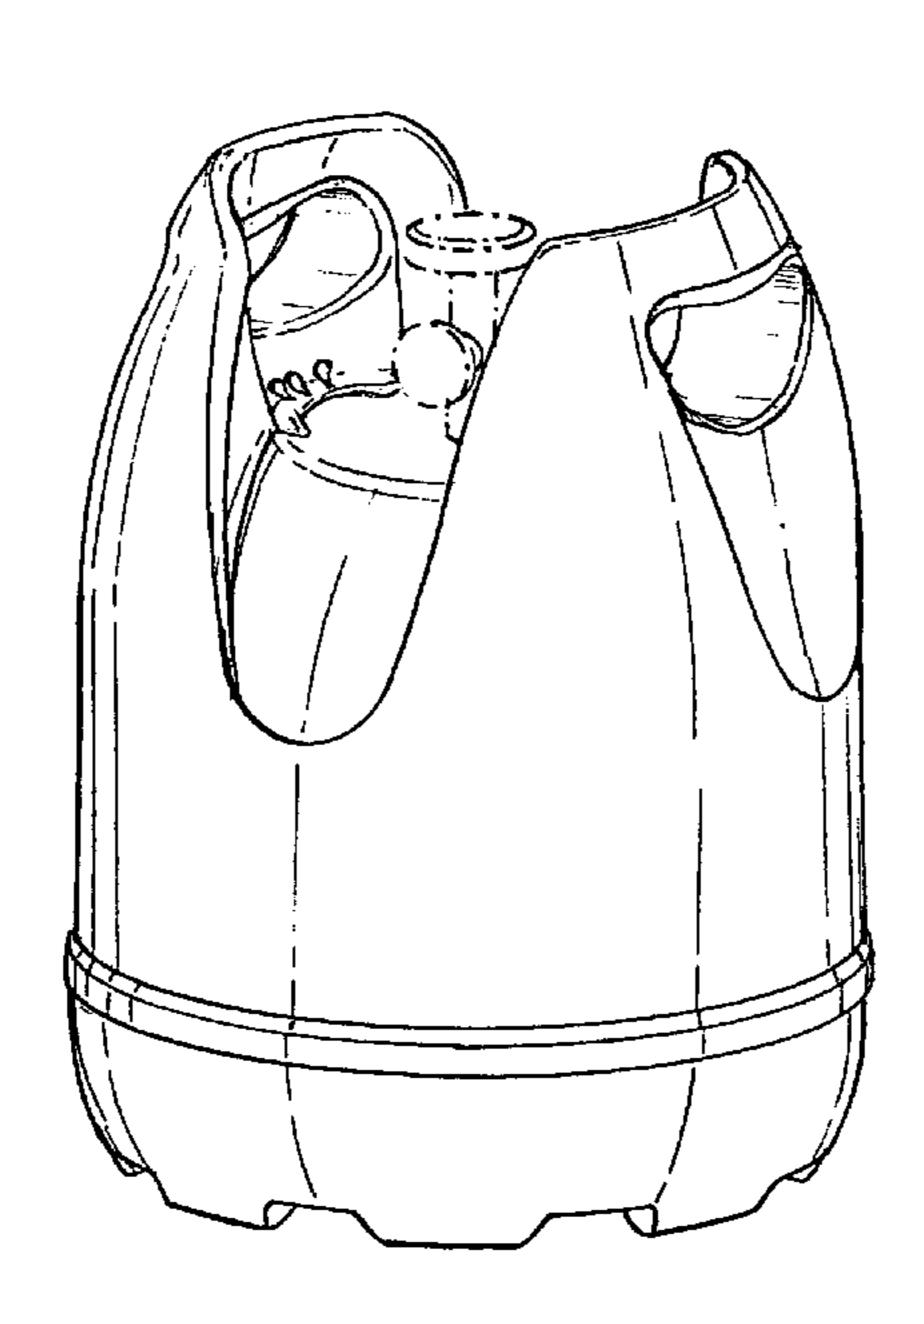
is a front elevational view of the transportable gas cylinder of FIG. 1. The broken lines showing the valve assembly are for illustrative purposes only and form no part of the claimed design;
